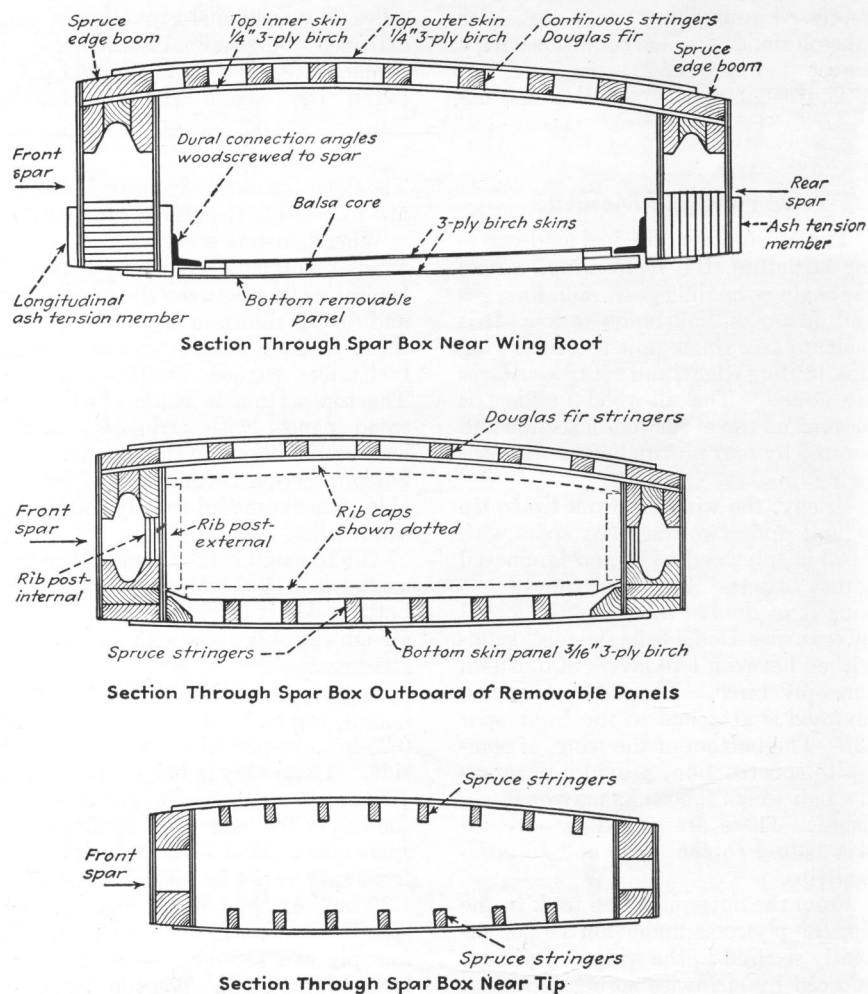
Section details of a spar box at three locations: top, near the wing root; center, outboard of removable panels; and bottom, near the tip.
